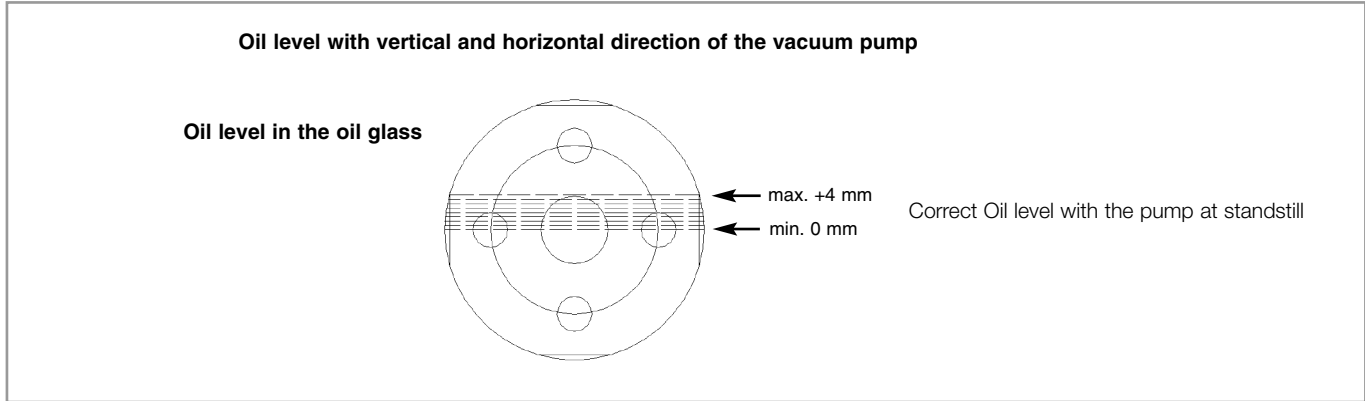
WH (U) 4400, WH (U) 7000, GS555, PFPE oil
